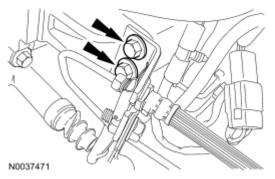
Locating Clutch Tube Bracket Bolts Courtesy of FORD MOTOR CO.
